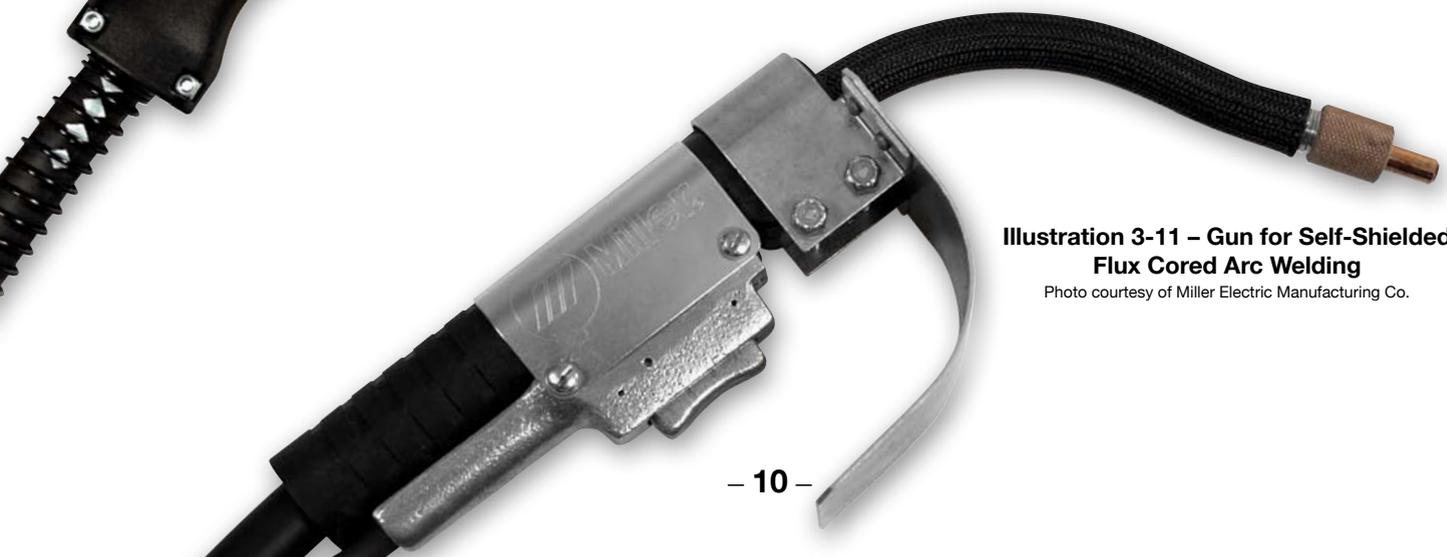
Gun for Self-Shielded Flux Cored Arc Welding
